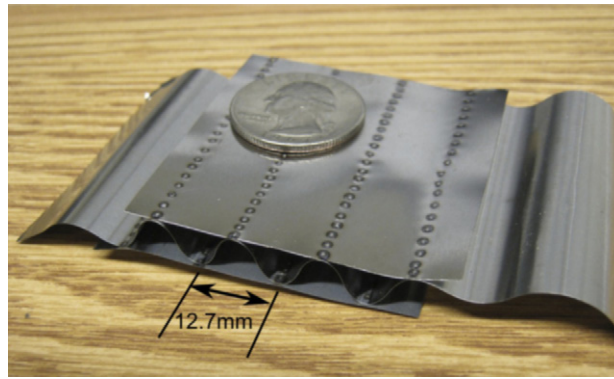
Photograph of sample spot-welded circularly corrugated spring layer ($\lambda = 12.7$ mm and $t_s = t_f = 50.8$ μm) manufactured after refinement of construction procedure.
